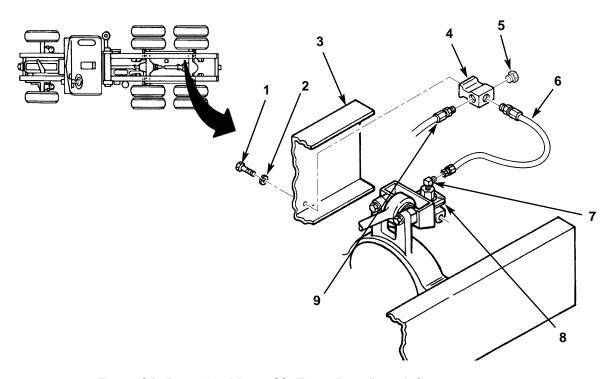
Removing Mountable Tee at Rear-Rear Axle.
